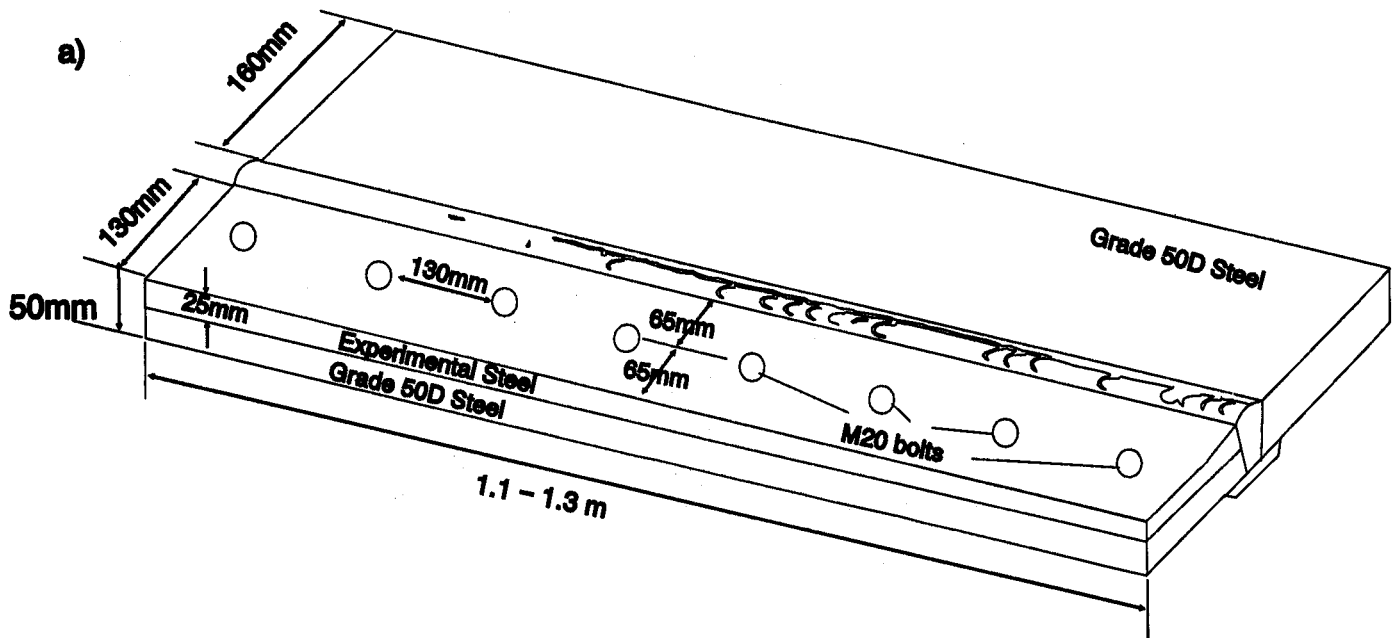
a) WELD PROCEDURE FOR TWO PASS SAW WELDS (5kJ/mm)
